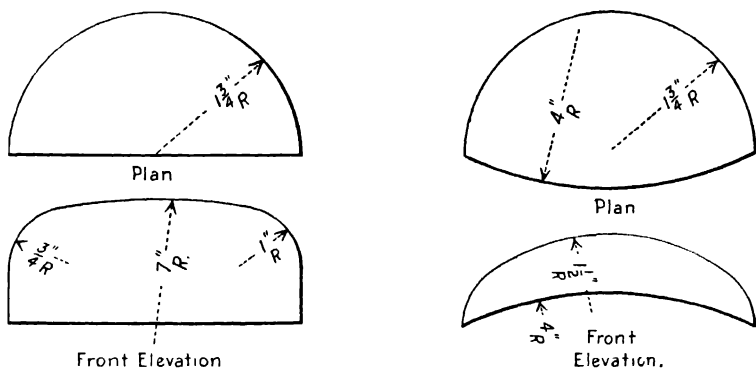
Iron Blocks of Different Shapes Used to Remove Body and Fender Dents.
